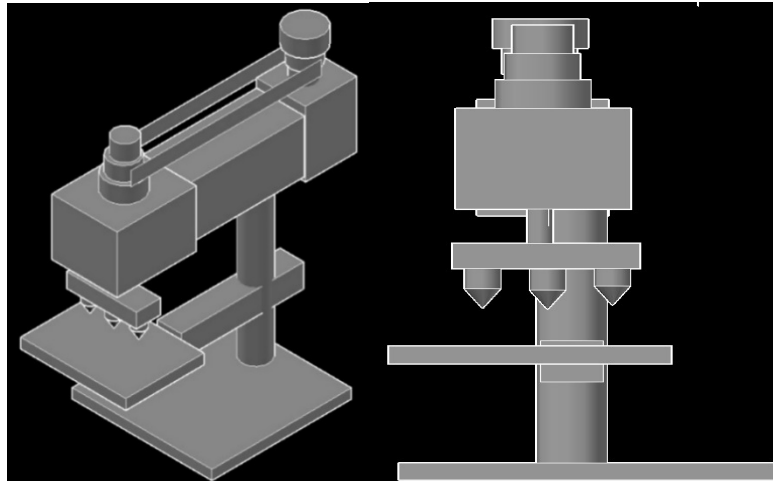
2D &3D modeling of Multi spindle drilling machine
